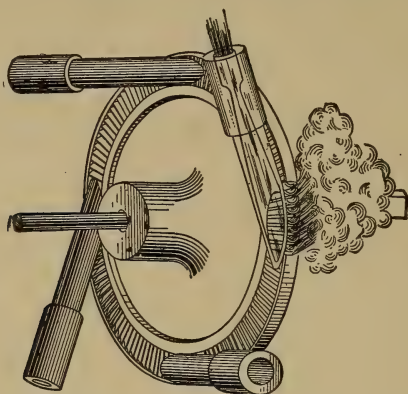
THE DE LAVAL TURBINE WHEEL AND NOZZLES.
